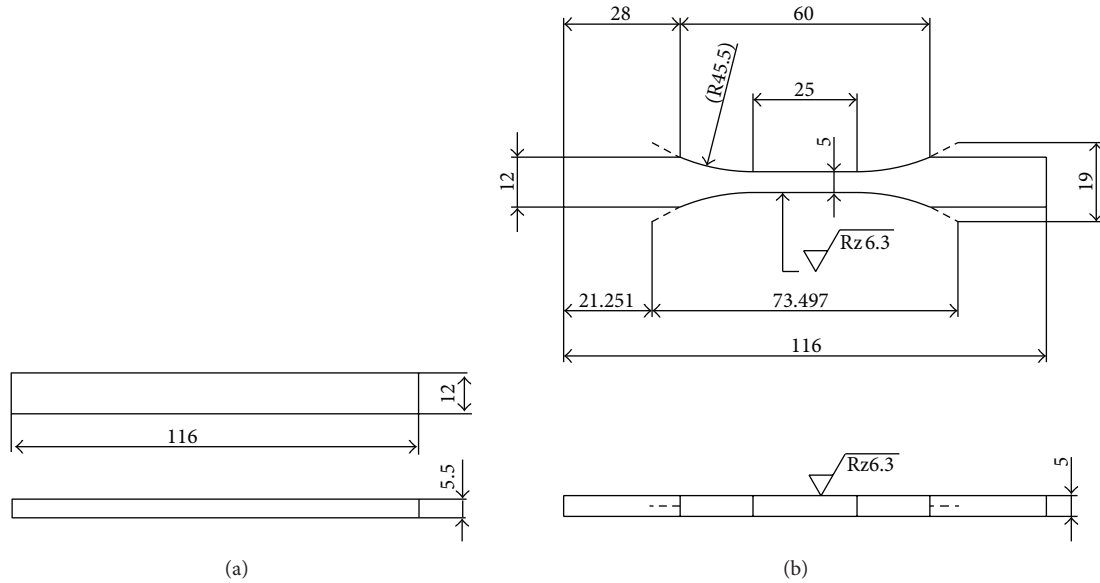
Laser beam melted workpiece (a) and machined specimen (b) geometry for tensile test.
